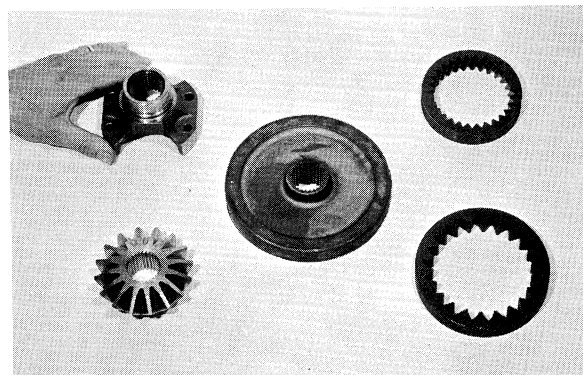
Typical internal pump gears, universal joint, truck gear and bevel side gear whose processing has been simplified and improved by using Red Ring concentricity broaches.
